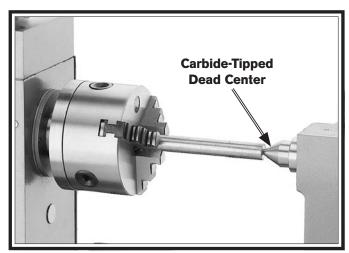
Example photo of using a carbide-tipped dead center installed in the tailstock.
